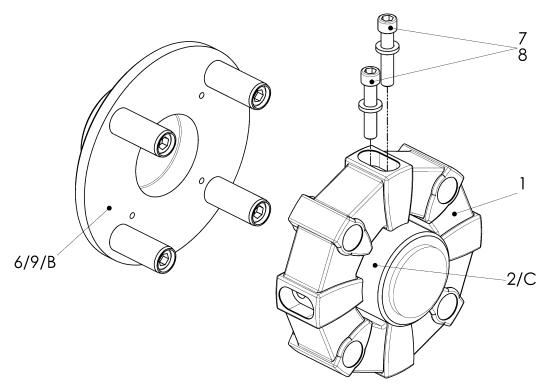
Mounting the rubber element (Type 008A-00400...00600-.S..)
